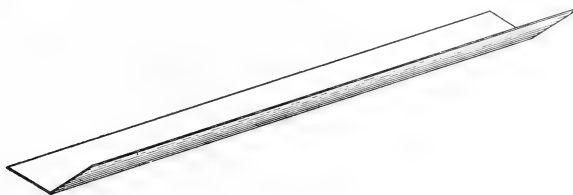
SHOWING FORM OF GUTTER (ONE-THIRD ACTUAL SIZE).
